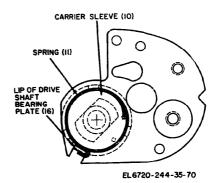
Spring location (spring (11) from fig. 3-14).
